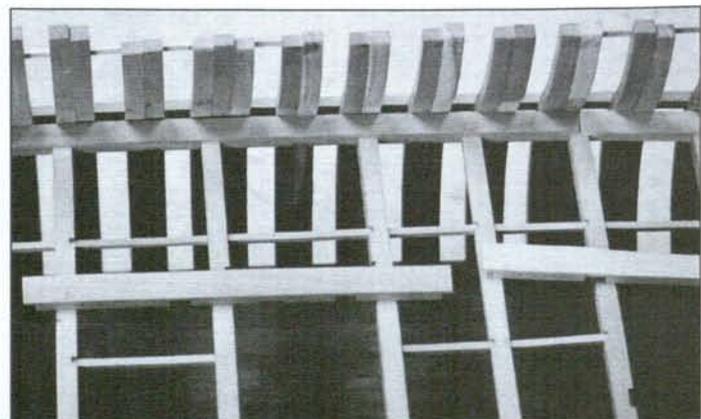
(right). Short sections of the inner waterway timber notched to fit over the deck beams.
